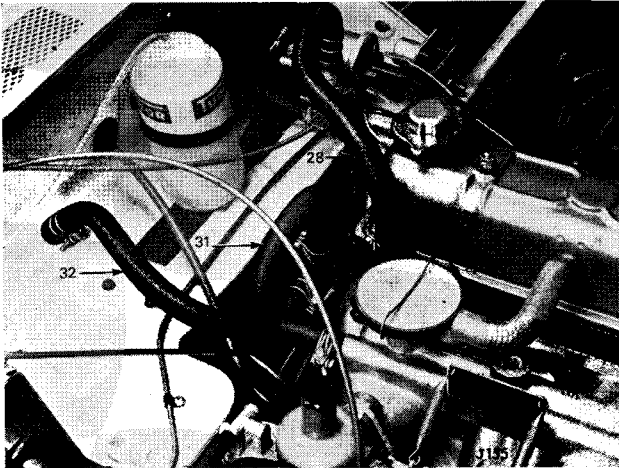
Heater pipe details (Spitfire Mk. 3)
